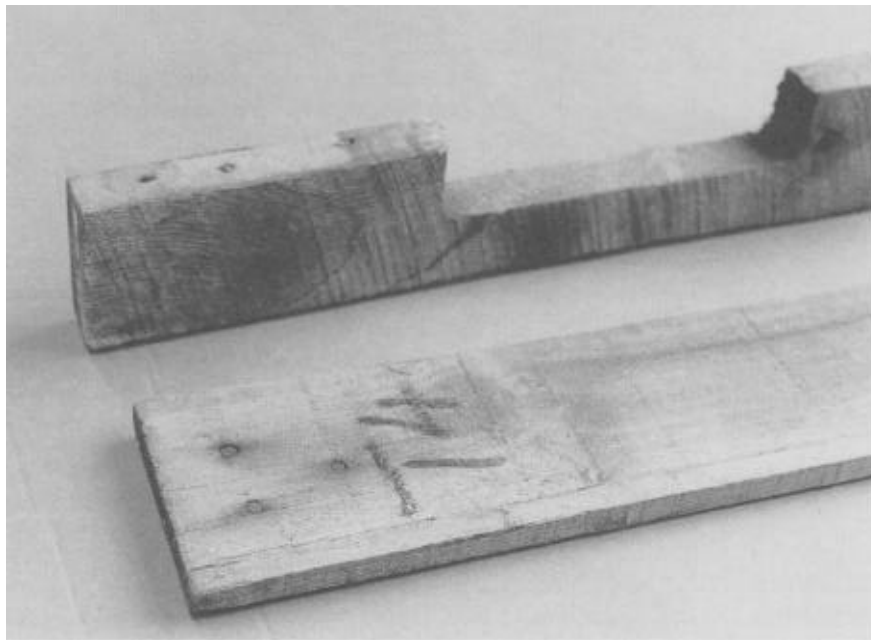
Typical nail holes and nail stubs in used deckboards and stringers.
